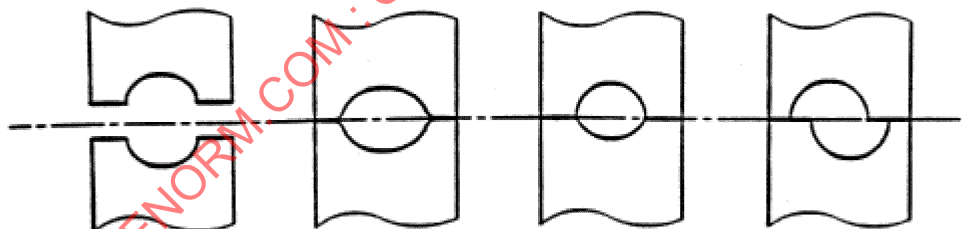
Unacceptable Wire Stripper Blade Cavities Have Asymmetrical Shapes, Do Not Form Complete Perimeters, and Do Not Form Complete Cylinders
